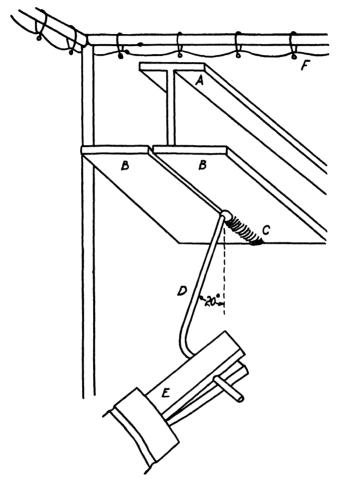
The method of welding an overhead arc weld. The coated electrodes only, keep a very close arc and wear an abundant amount of protective clothing. A Fixture, B Base metal, C Bead, D Electrode, E Electrode holder, F Booth curtain
